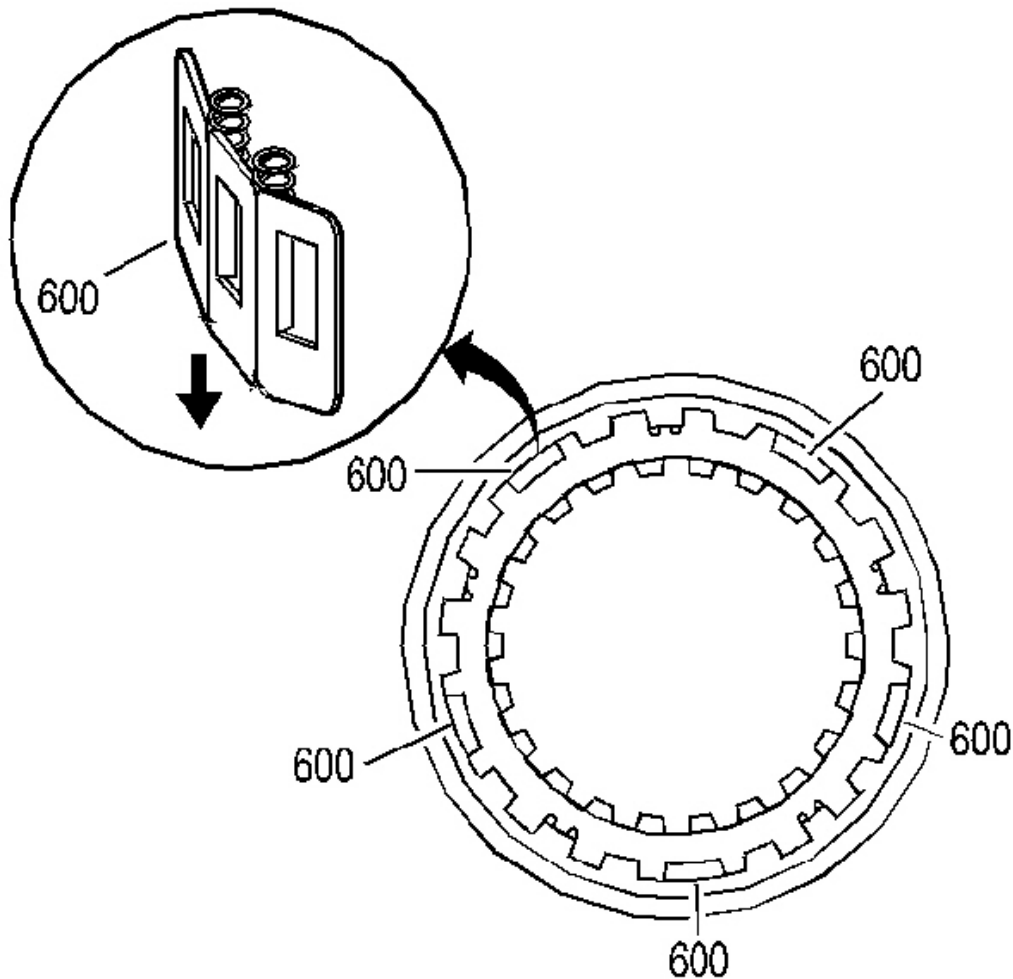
Identifying 3-4 Clutch Boost Spring Assemblies
